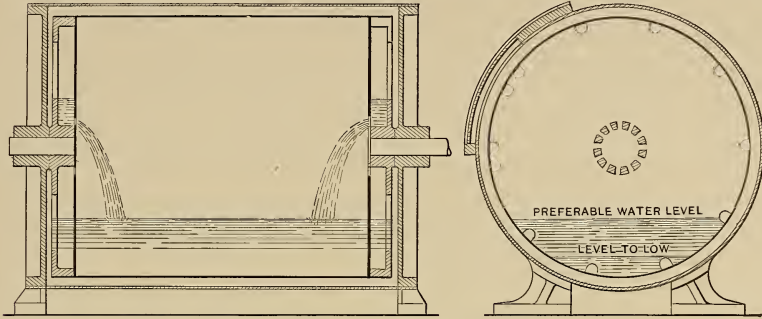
THE COMMONEST FORM OF WASHING MACHINE
